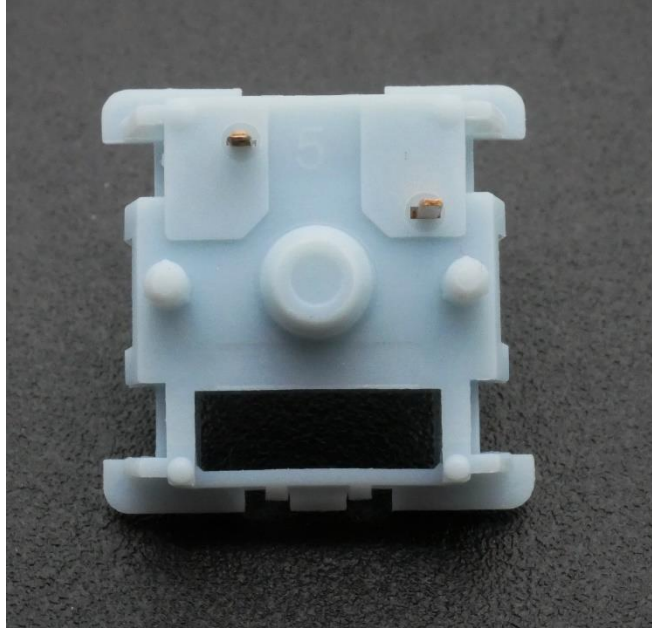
Momoka Shark bottom housing externals showing PCB mount pins and inward facing, single number mold marking.
